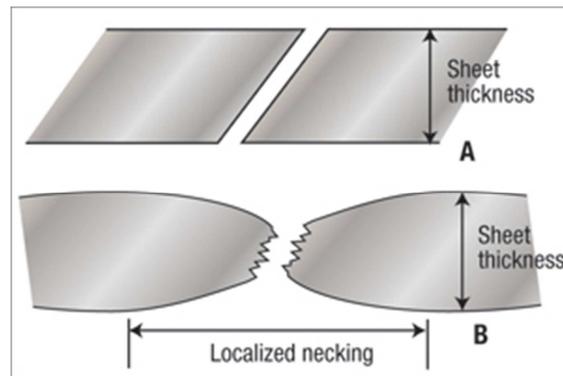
Fracture profiles of brittle fracture (A) without any through-thickness thinning, and ductile fracture (B) showing extensive localized thinning.
